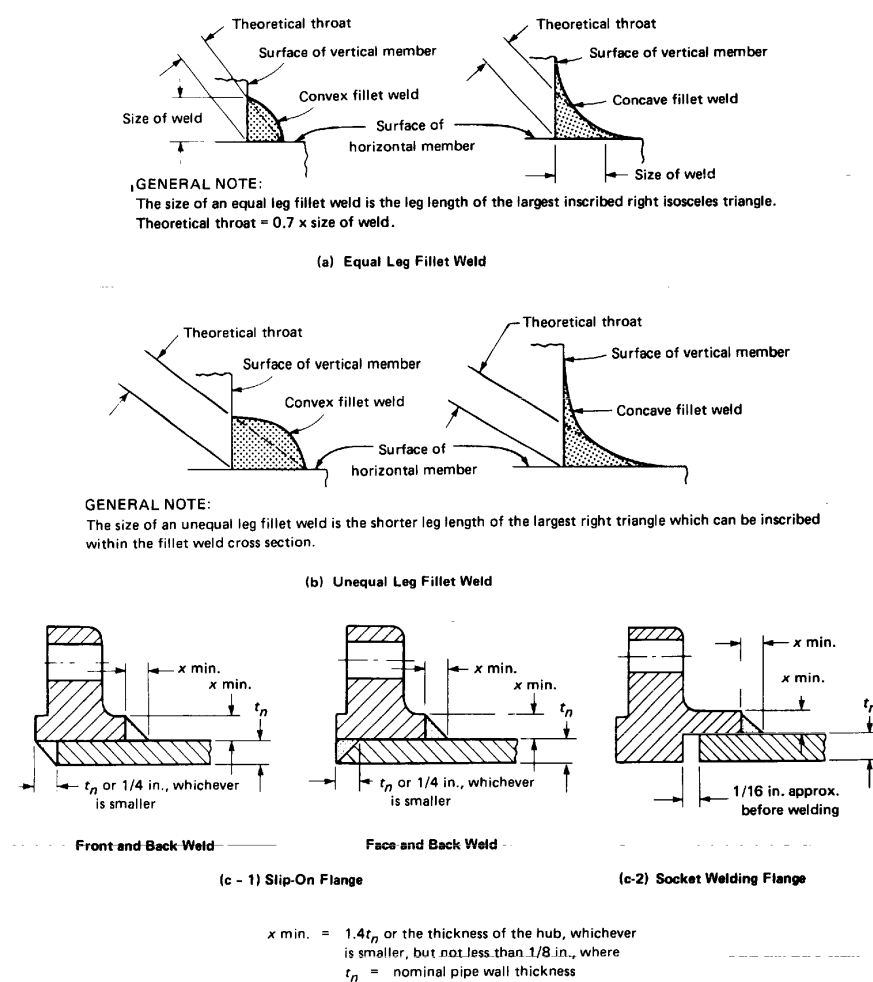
FILLET AND SOCKET WELD DETAILS AND DIMENSIONS
